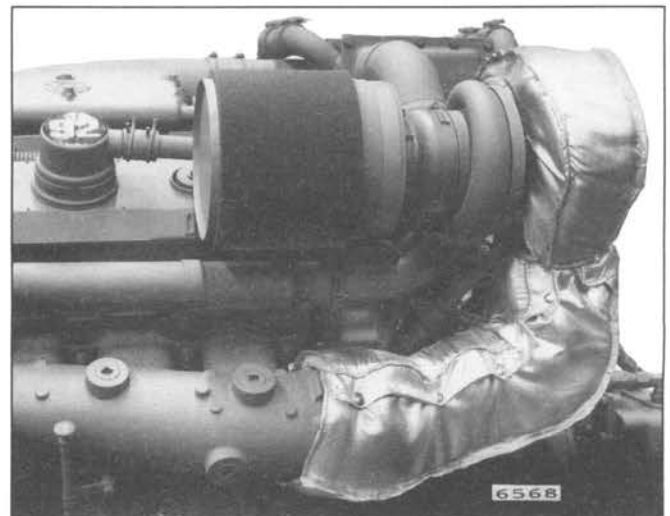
Typical Water-Cooled Exhaust Manifold Installation (8V-92 Engine Shown)
